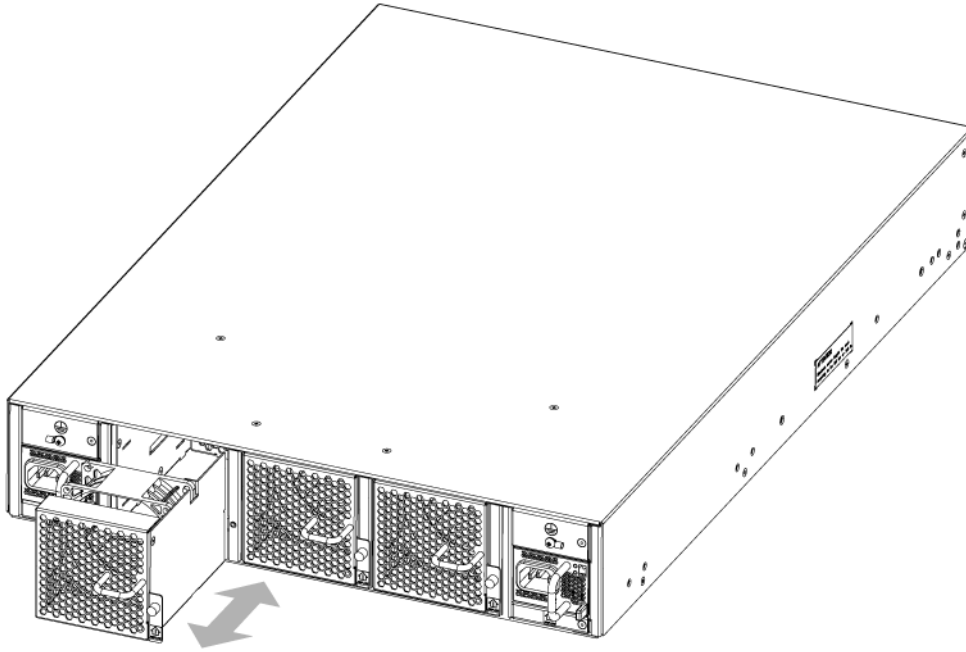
Inserting the fan in the HPE StoreFabric SN6500B 16Gb FC Switch or the HPE StoreFabric SN4000B SAN Extension Switch
